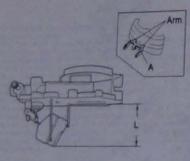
Float height adjustment (top cover upright) Alsan carburetter (Sec. 12)
